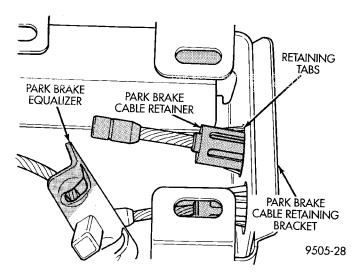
Park Brake Cable Installed In Retaining Bracket
